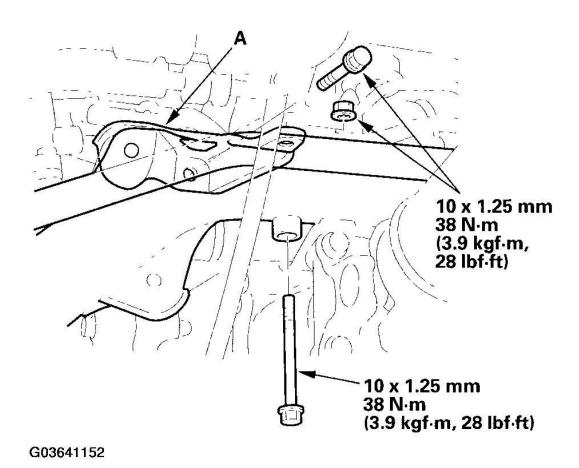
Installing Gearbox Stiffener Bracket Courtesy of AMERICAN HONDA MOTOR CO., INC.
